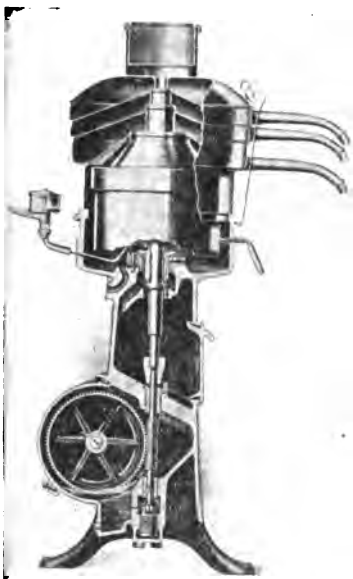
SEC. 8.—Sectional view belt-driven machine.
